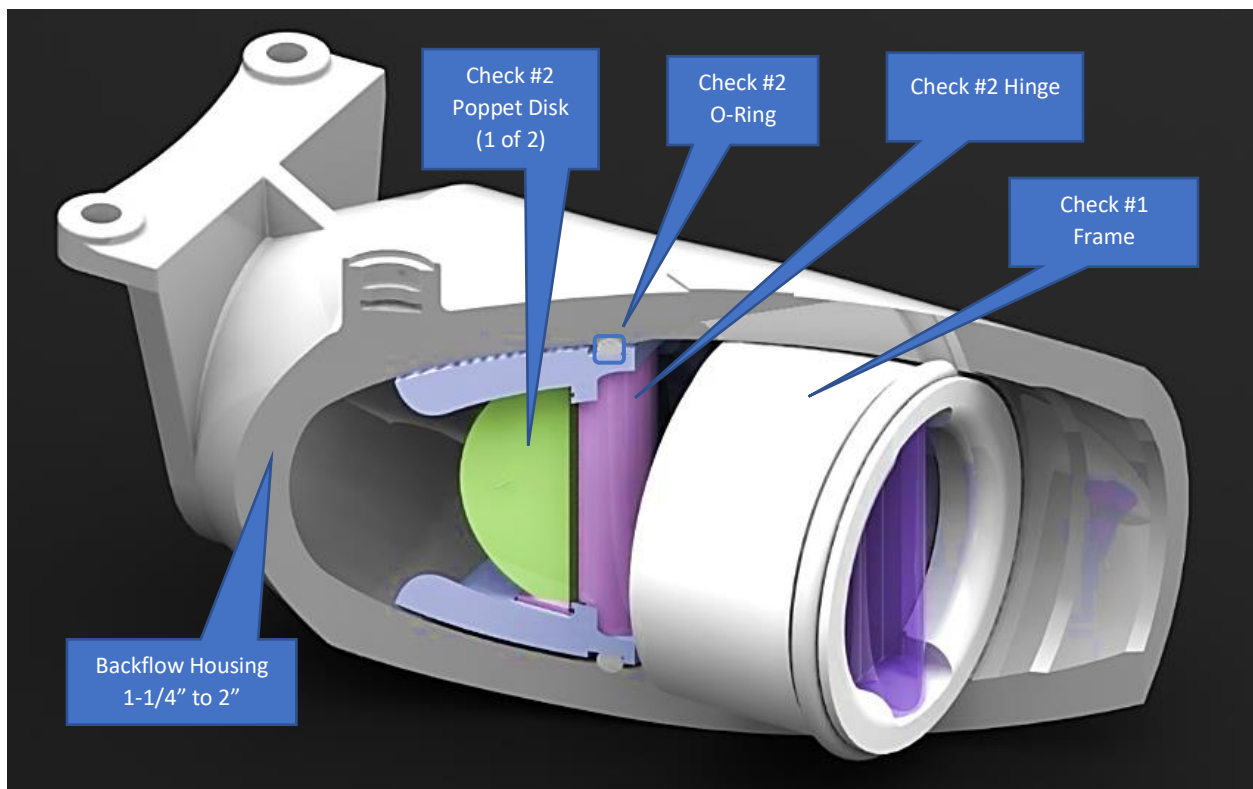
Isometric Sectional View of Double Disk Valve Assembly
